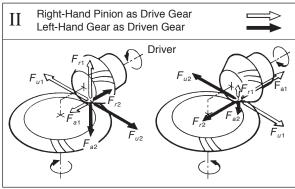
The Direction of Forces Carried by Spiral Bevel Gears (2)
